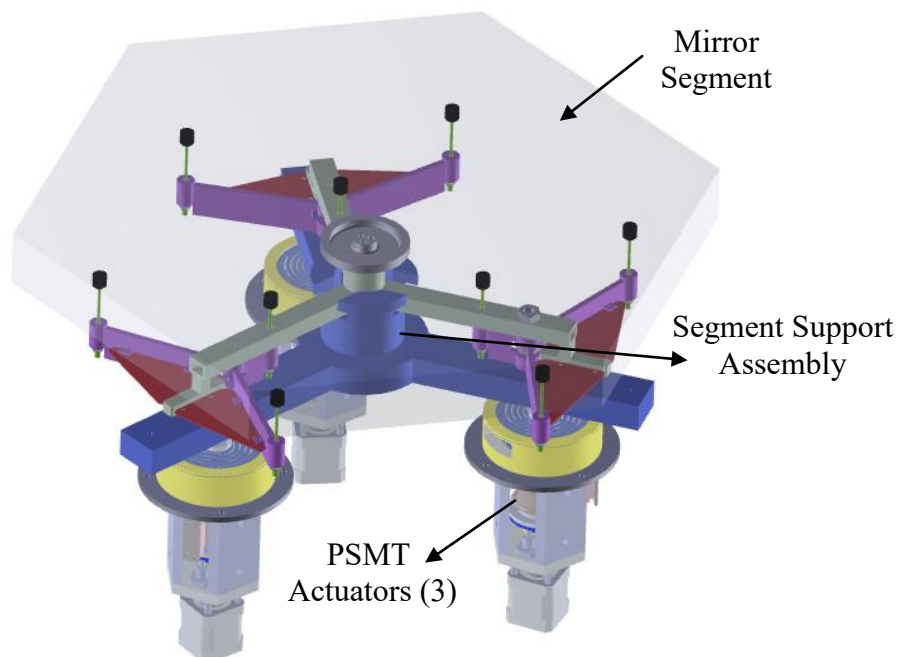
Concept design of PSMT Primary segment assembly with three prototype actuators.
